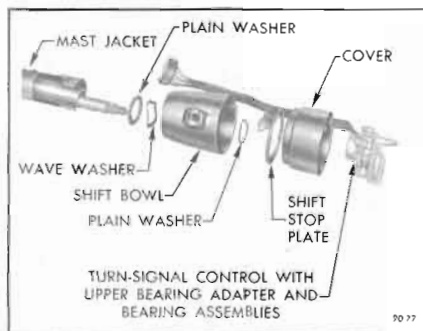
Disassembly of Upper Portion of Automatic Transmission Mast Jacket (43-44000 Series)
